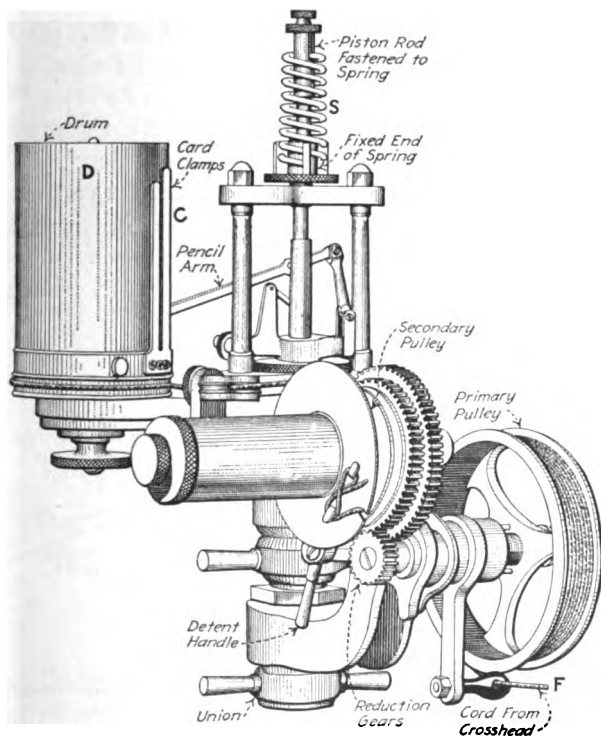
Crosby outside-spring indicator with reducing wheel attached.
